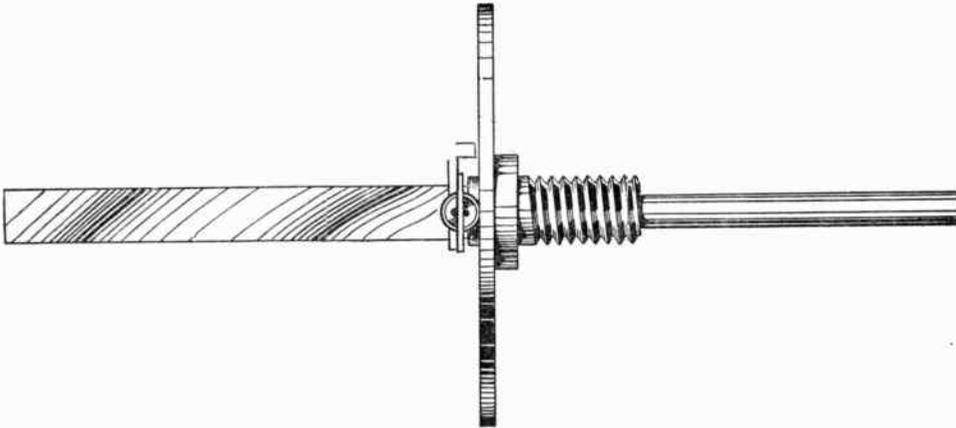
The control spindle and locating plate; the switch wafers are threaded on the flat "blade." Illustration three-quarters full size.
